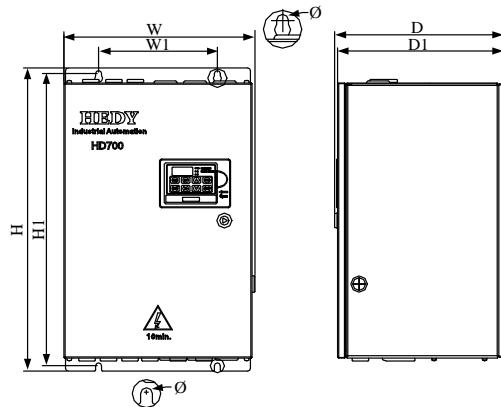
Mechanical dimensions and mounting (Size E1, F)
